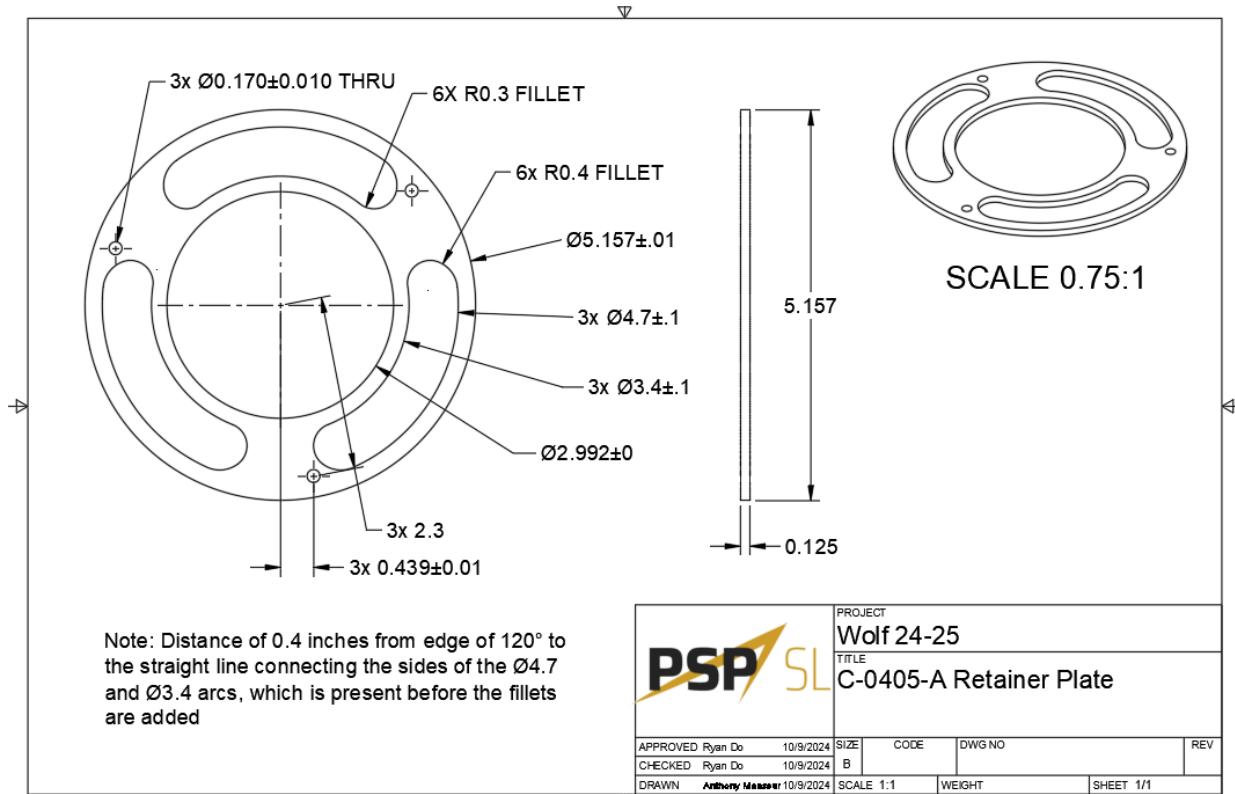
Motor Retainer Plate Technical Drawing
